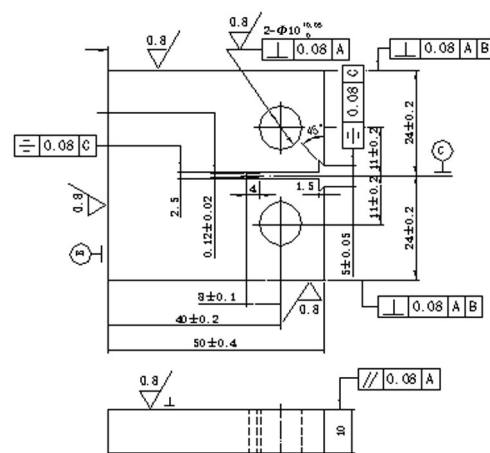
Shape and dimensions of fatigue crack propagation samples^[21]
